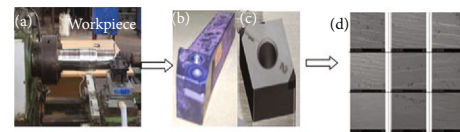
(a) Experimental setup, (b) tool holder, (c) insert, and (d) SEM image of flank wear.
